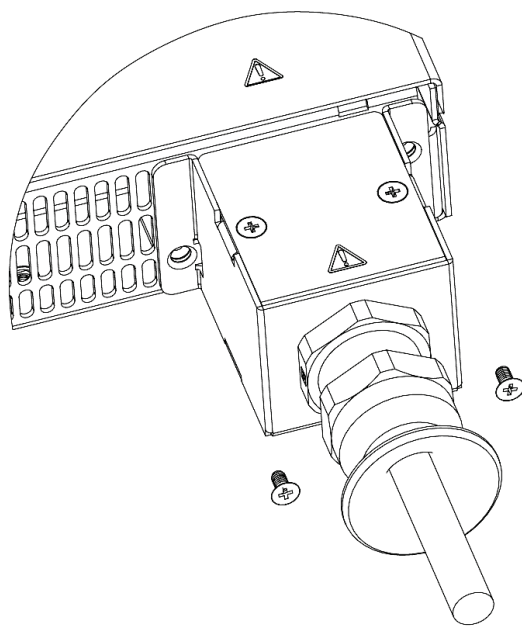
Strain Relief Assembled to Power Supply Rear Panel
